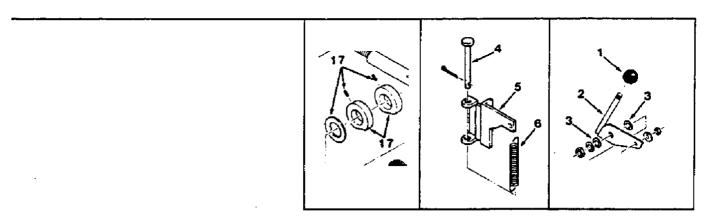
DRIVE CARRIAGE ASSEMBLY
